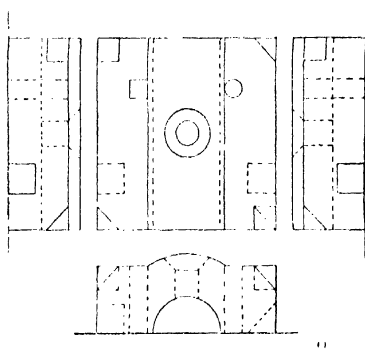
PROJECTION DRAWING, LESS SIMPLE.
